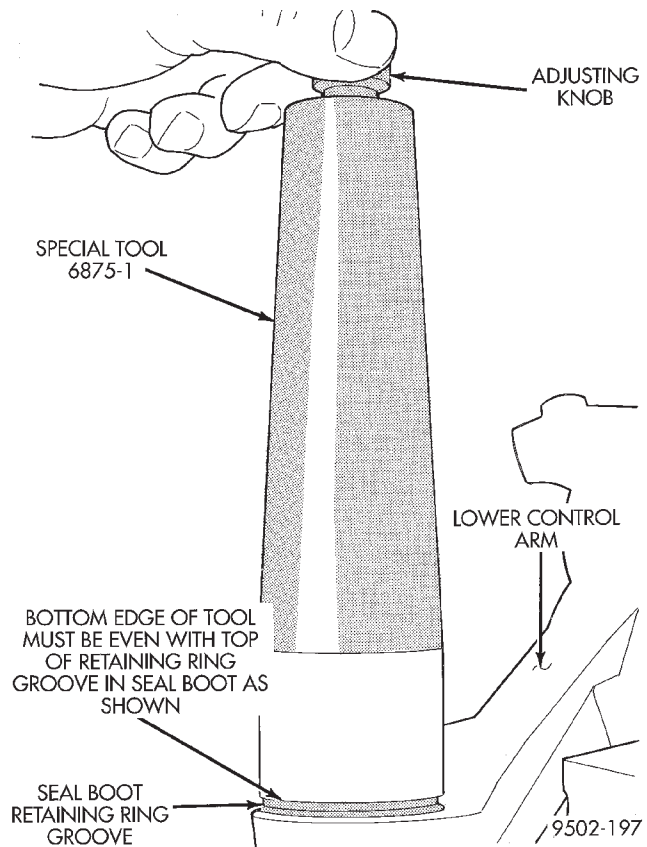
Correctly Installed Ball Joint Seal Retaining Ring Tool
